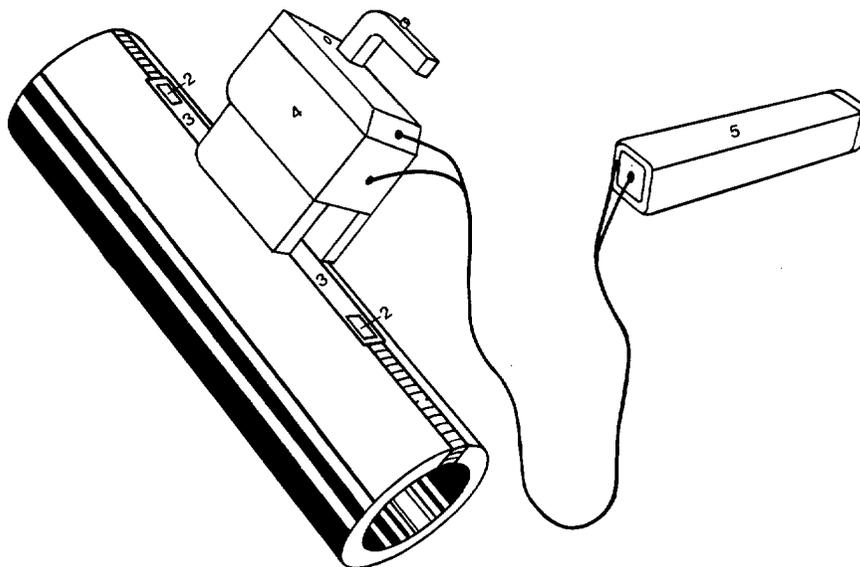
1) Weld; 2) permanent magnet; 3) tape; 4) yoke; and 5) power supply.
